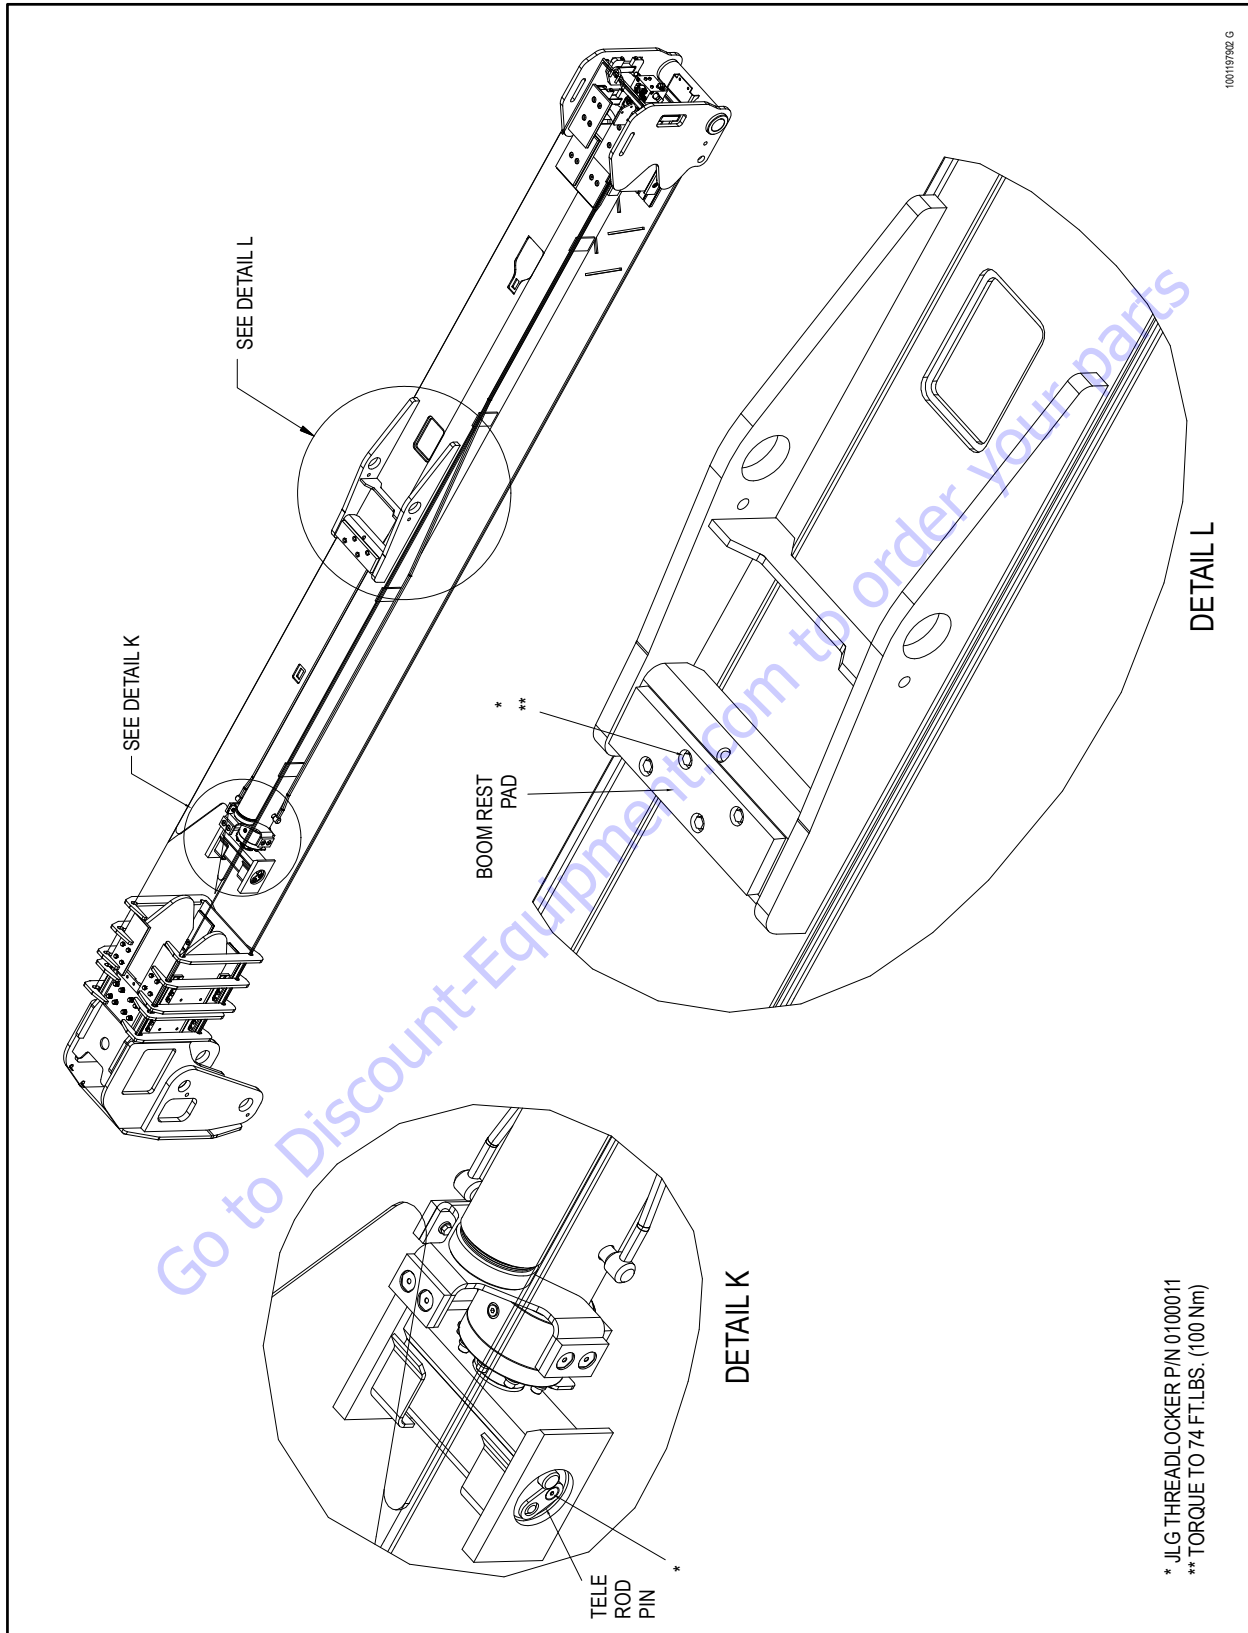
Tower Boom Assembly - Sheet 6 of 6
